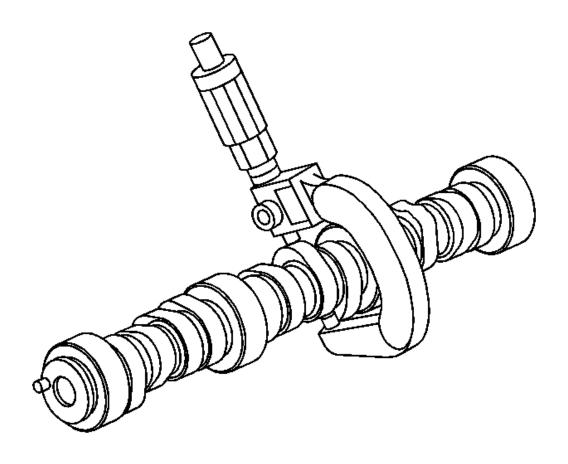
Measuring Camshaft Lobes Courtesy of GENERAL MOTORS CORP.
